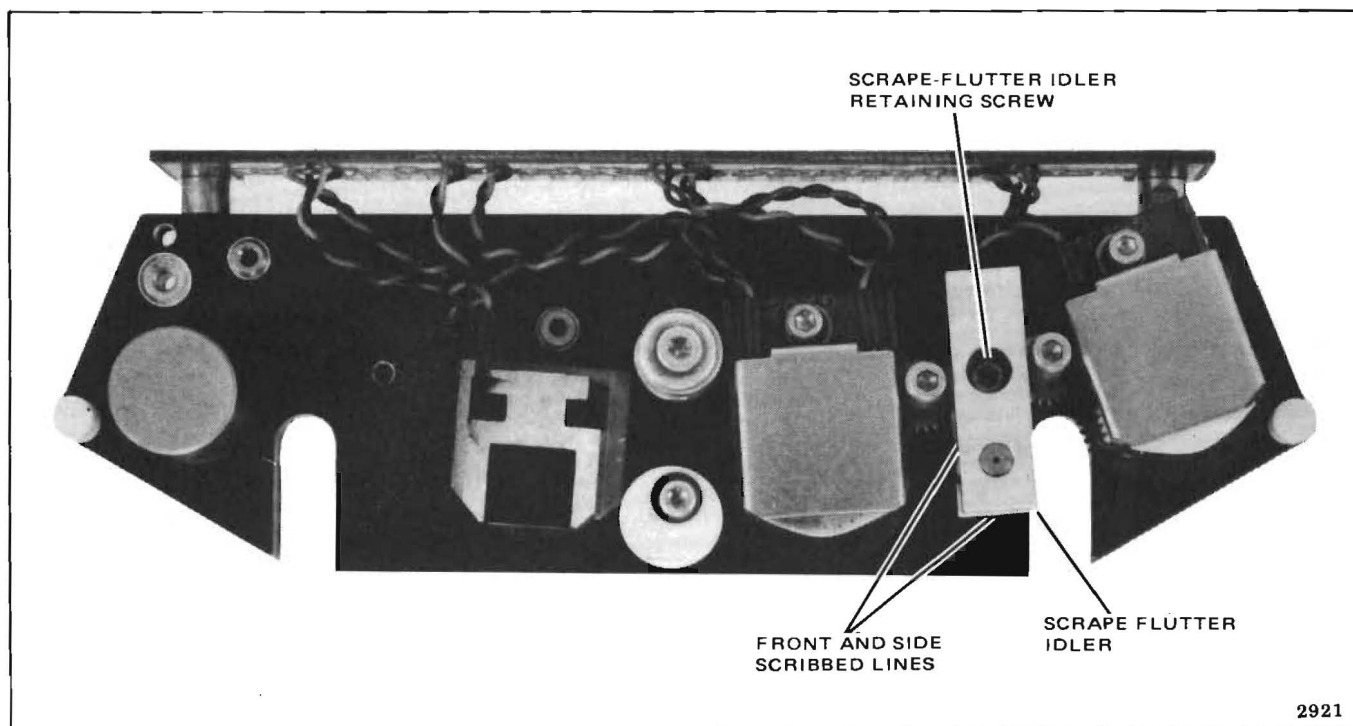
Top View of Head Assembly, Head Shield Removed
